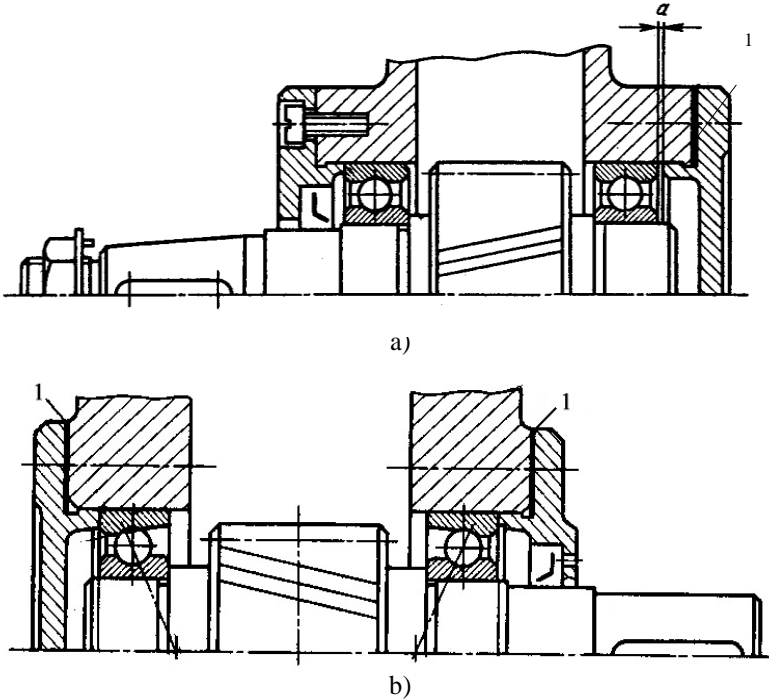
Inward arrangement of bearings: *a* – radial bearings; *b* – radial thrust bearings
